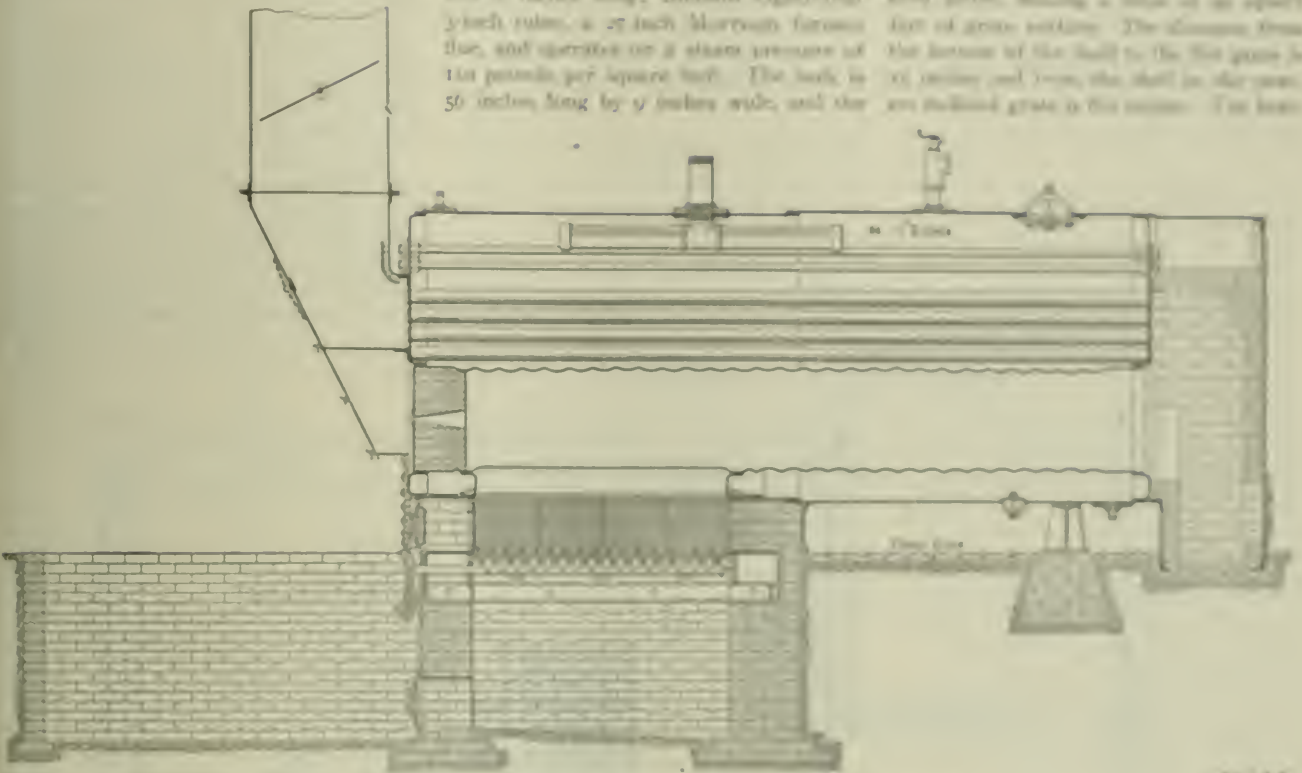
LONGITUDINAL SECTION THROUGH BOILER AND FURNACE
